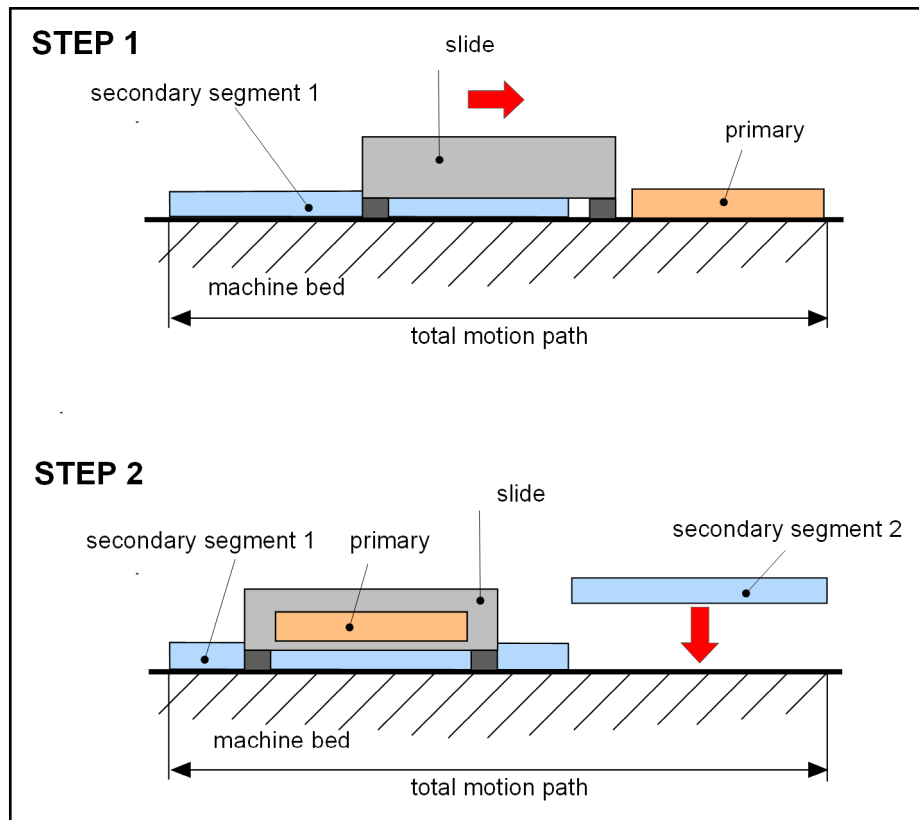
Installation of linear motor components at a path with several secondary parts
